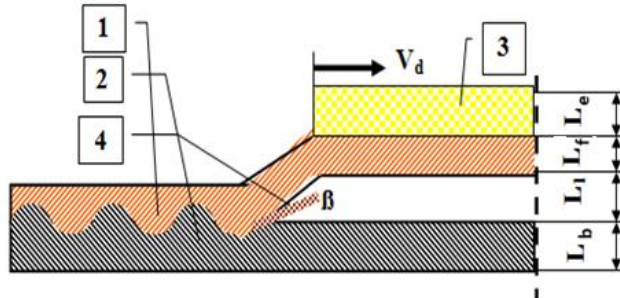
Setup of the explosion welding (1-clad plate, 2-base plate, 3-high explosive, 4-jet).
